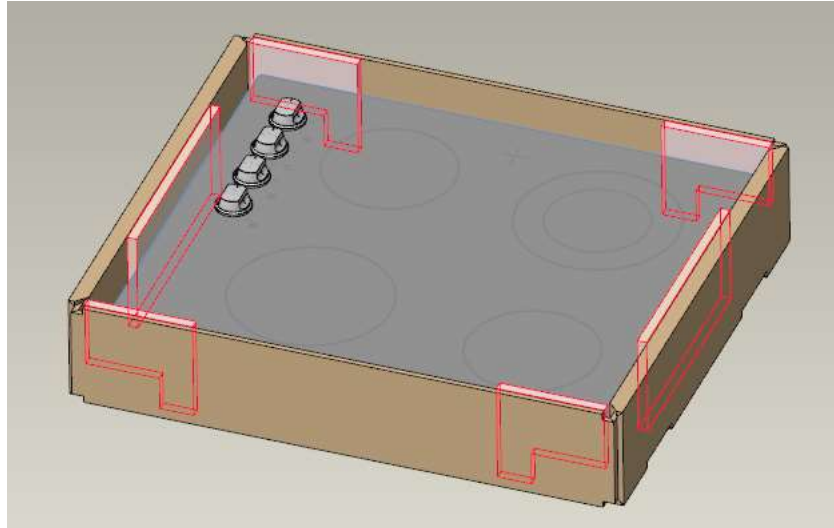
Honeycomb bottom part for vitroceramic hob model.
